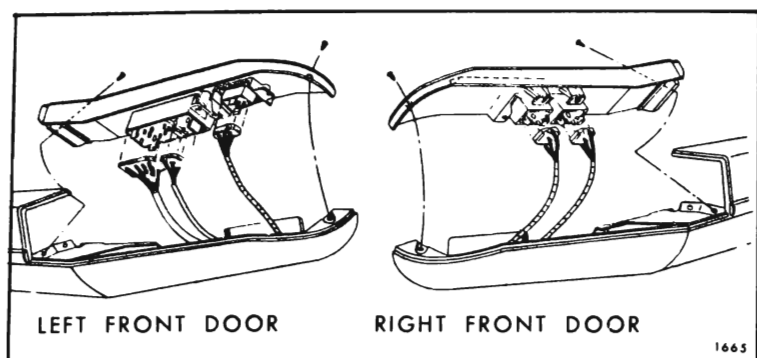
Front Door Arm Rest Switch Cover Assembly
